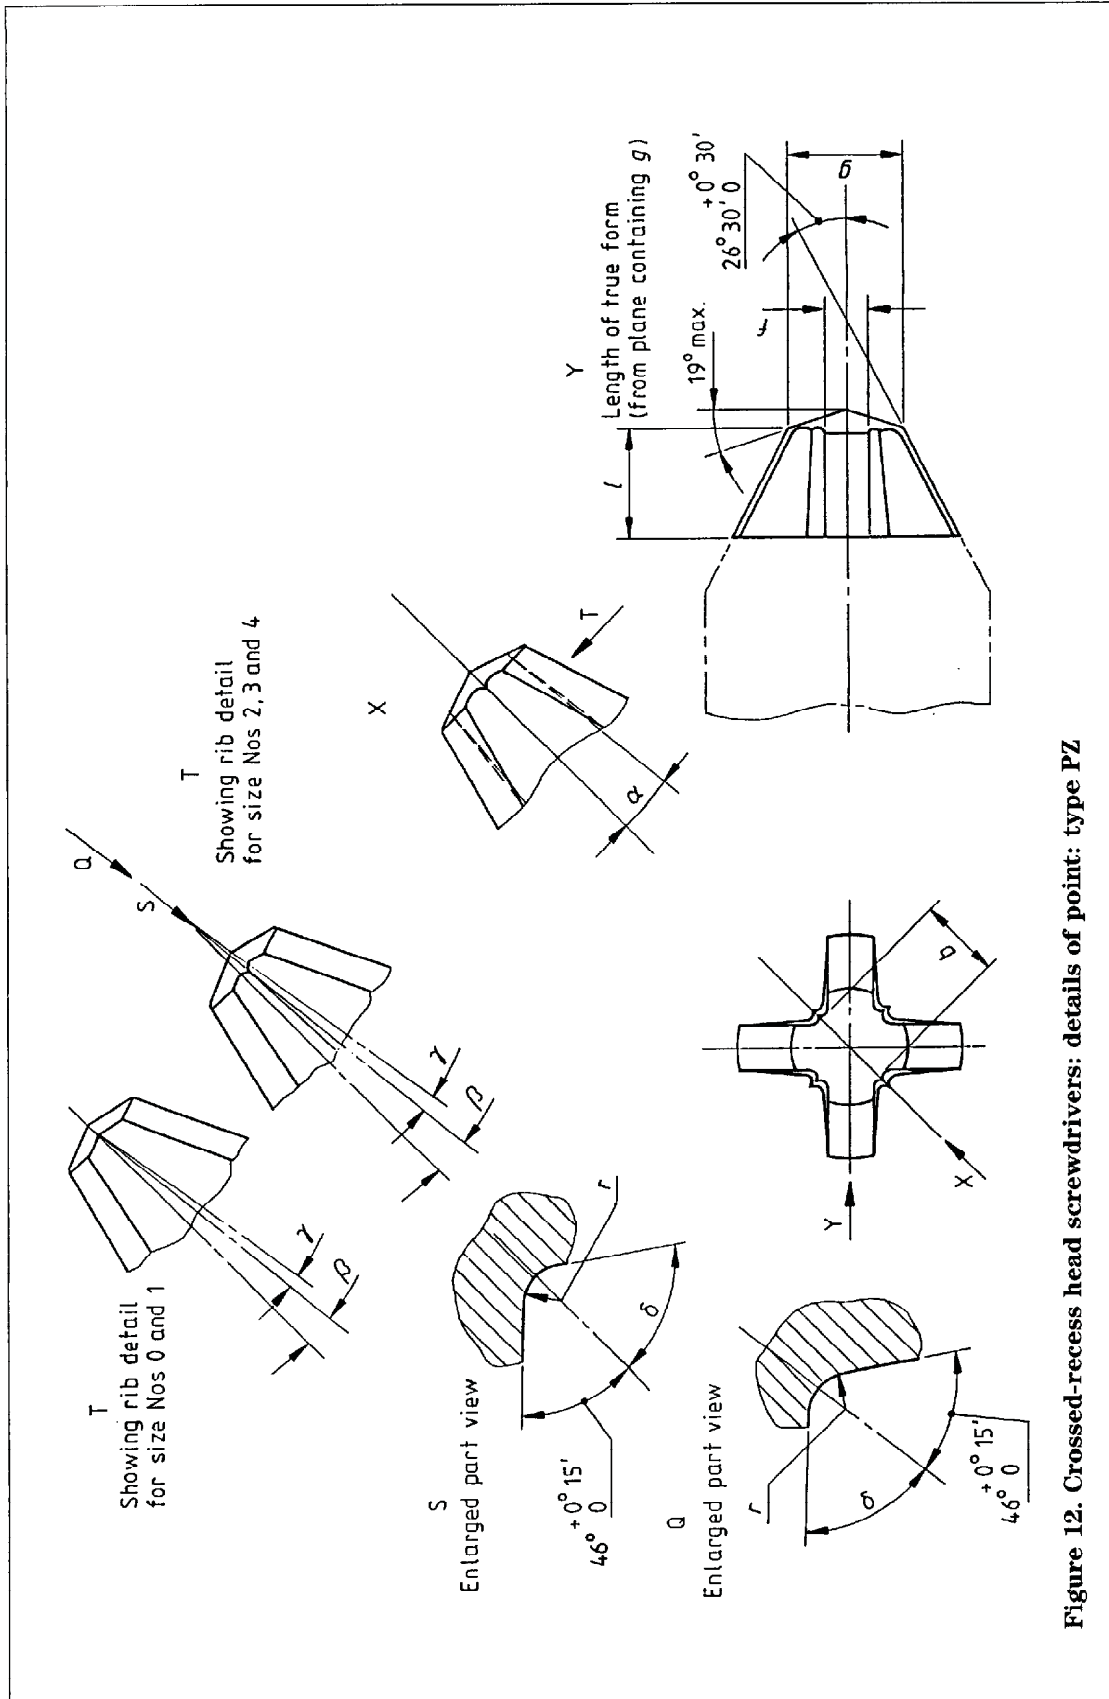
Crossed-recess head screwdrivers: details of point: type PZ
